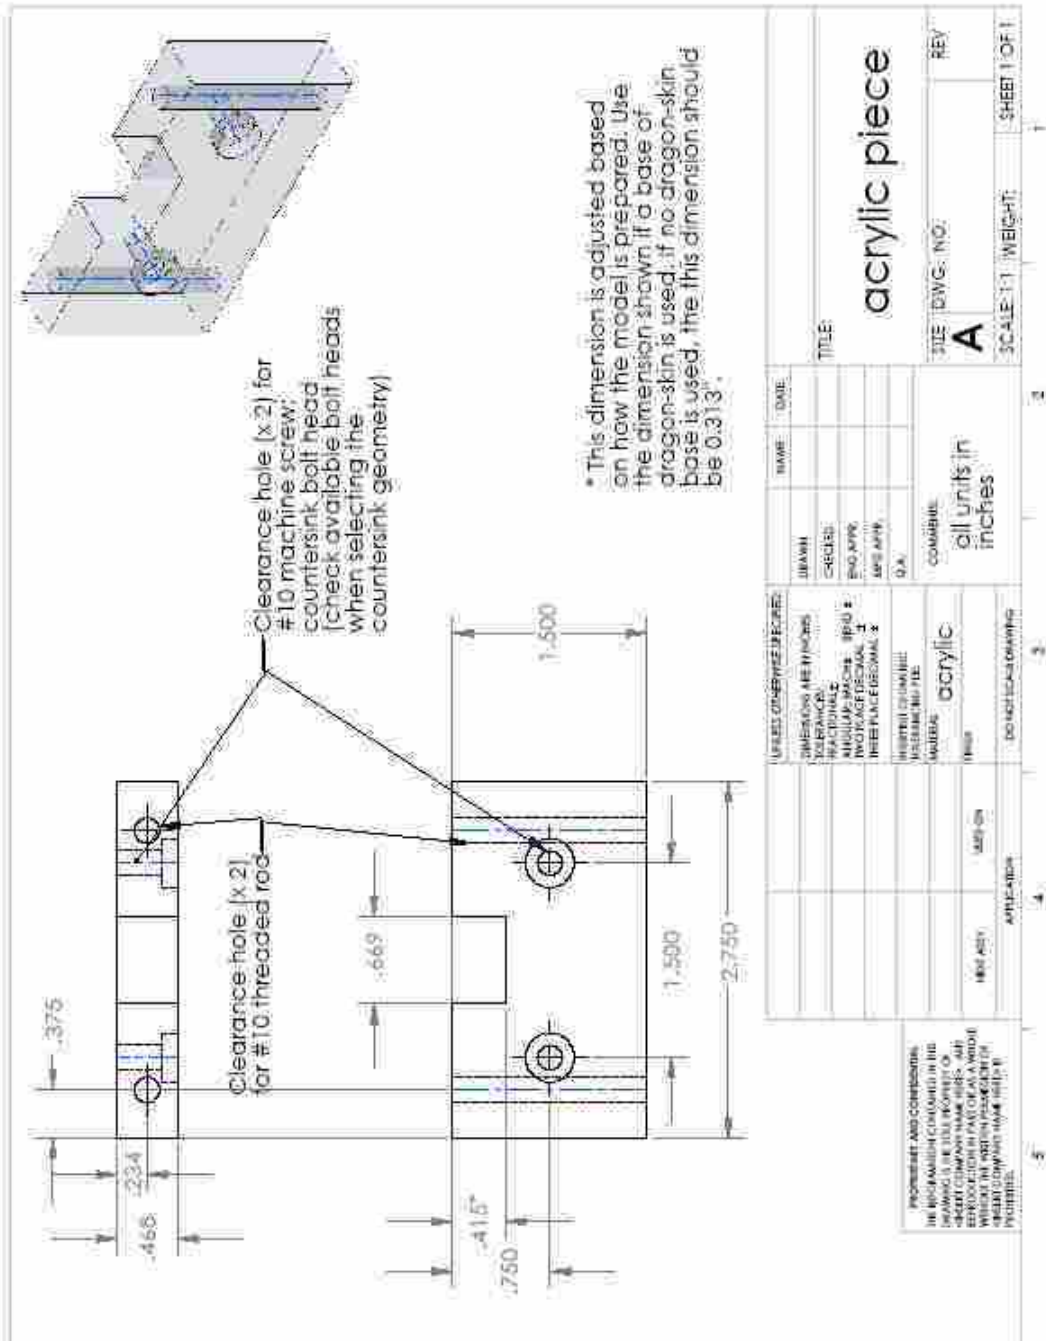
Drawing of acrylic piece used in Test Fixture B to fixture synthetic vocal fold model.
